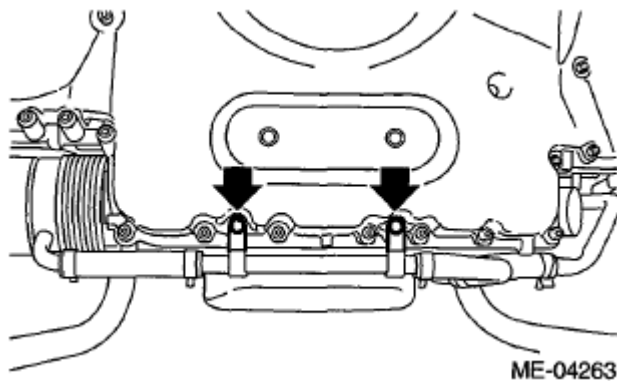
Locating Oil Cooler Pipe Of Chain Cover
